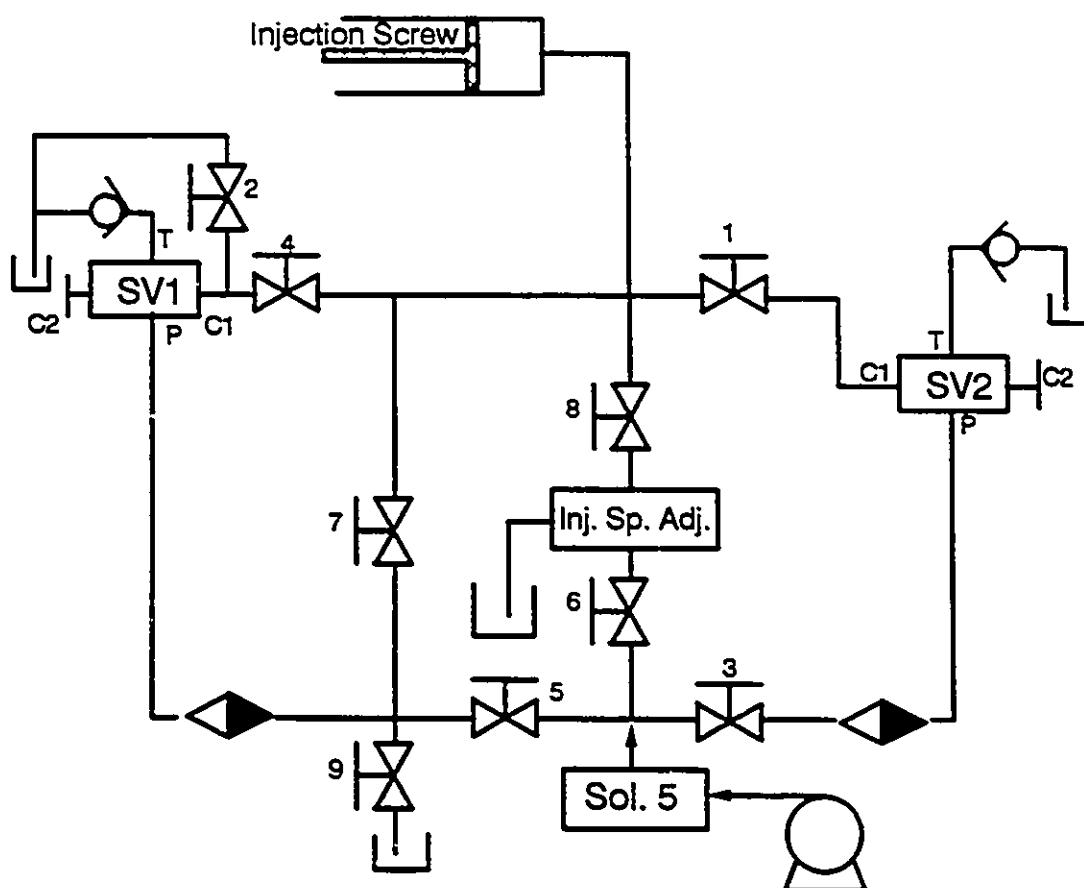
Modified hydraulic system of the McGill injection molding machine
